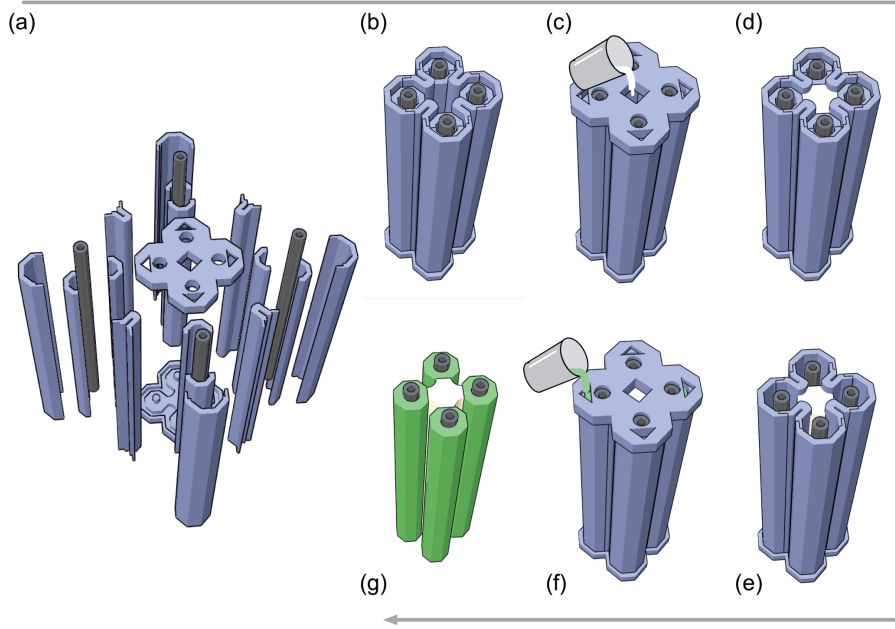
Fabrication of the sample. (a) The 3D printed mold and the steel tubes prior to assembly. (b) Assembled mold. (c) Casting of the Ecoflex 0030. (d)-(e) After two hours some inner parts are removed to make room for the second casting step. (f) Casting of the Elite Double 32. (g) After approximately one day, the sample is fully cured and can be removed from the mold.
